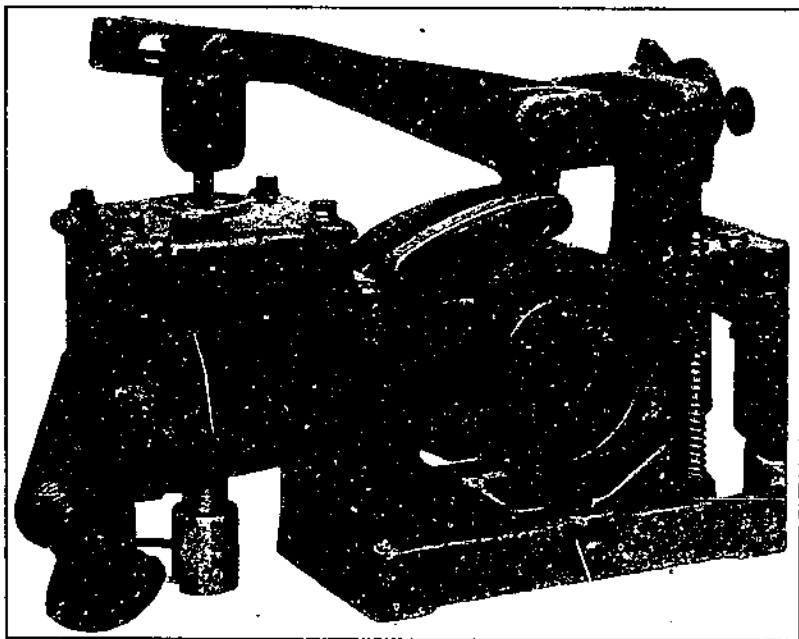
One type of spring-set solenoid brake. This type is suitable for use where the braking device moves through a vertical angle during the operation of the spin. Another and more common type of spring-set brake uses a heavy coil spring in connection with a horizontal rod connecting the brake-shoe levers across the top, the spring being held in the release position by the solenoid core.
